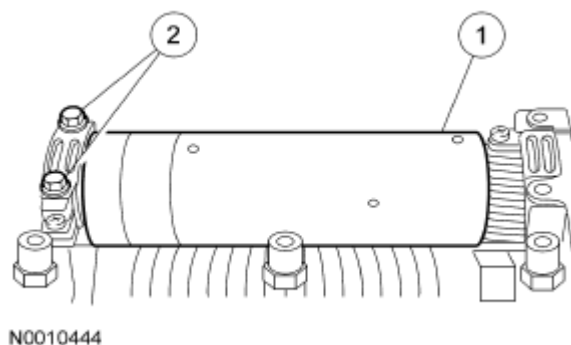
Identifying Balance Shaft Assembly And Bolts
